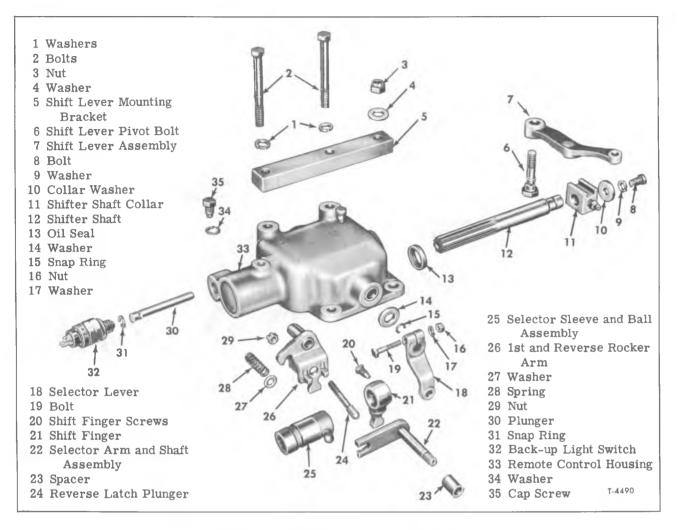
Remote Control Assembly (Clark 282V or 285V)
